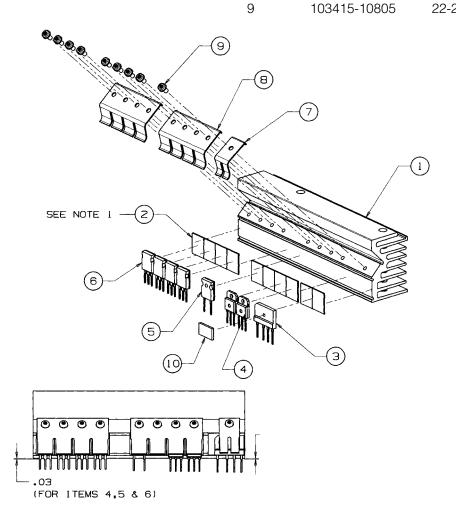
CE4000 PS Primary Heatsink Assembly (Exploded View)
